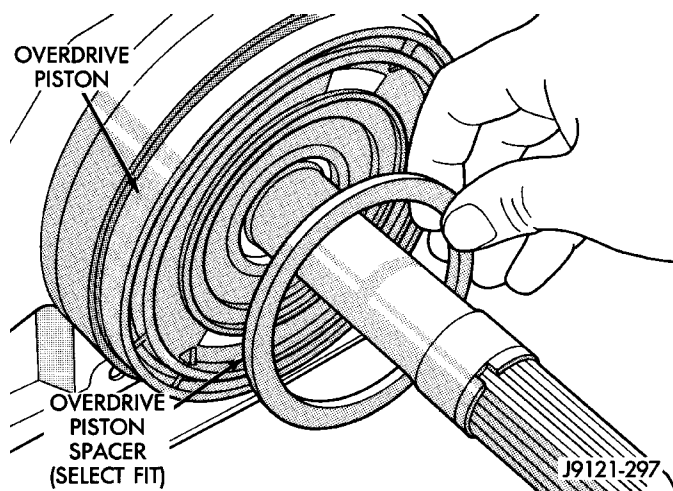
Overdrive Piston Thrust Plate Removal/Installation
